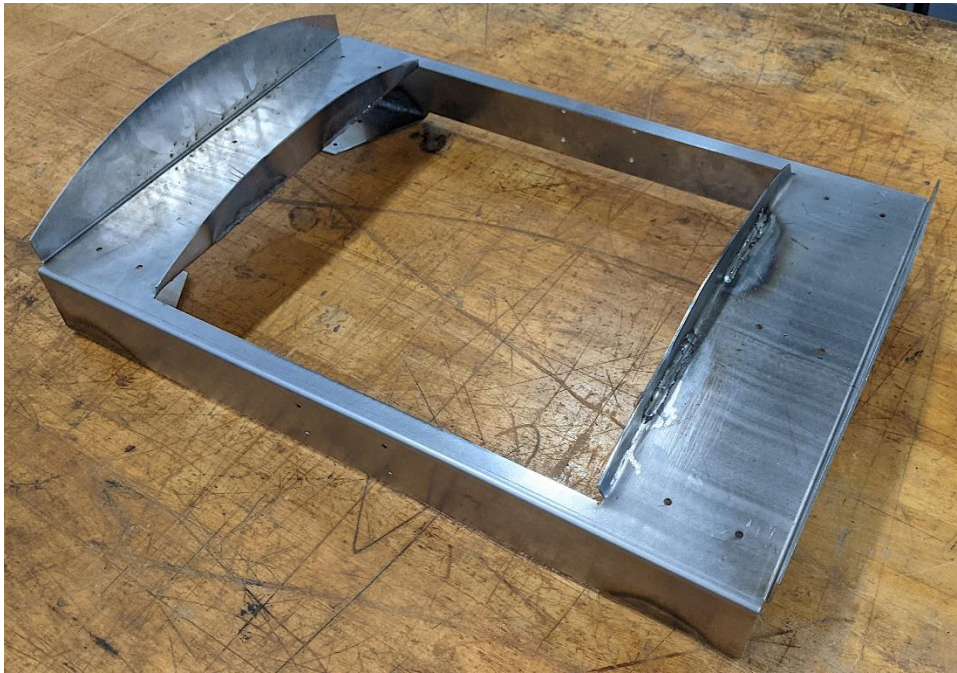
Z-axis carriage with stitch cuts reinforced by weld beads
